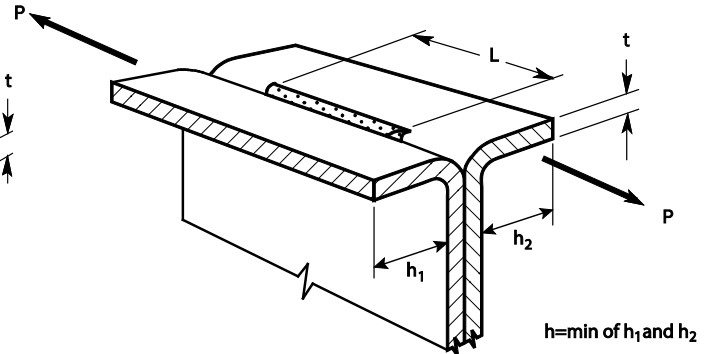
Shear in Flare V-Groove Weld
